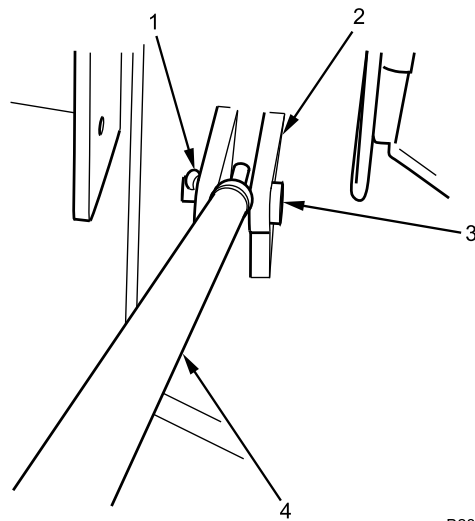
Lowering Upper Lock Bracket and Removing Gas Spring.
